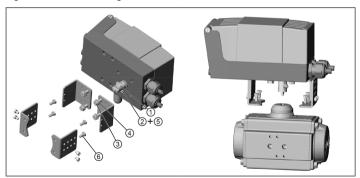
Attaching the assembly bridge, mounting the SideControl on the rotary actuator
